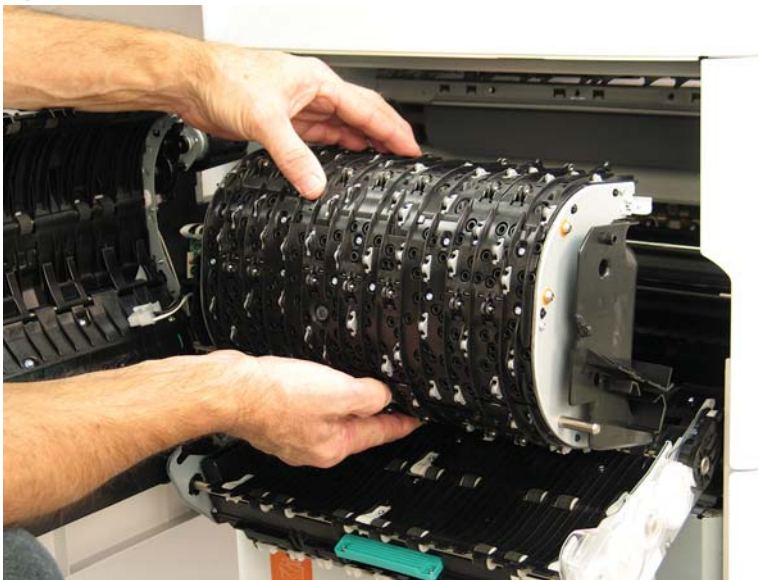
Slide the airflow assembly straight out of the printer
